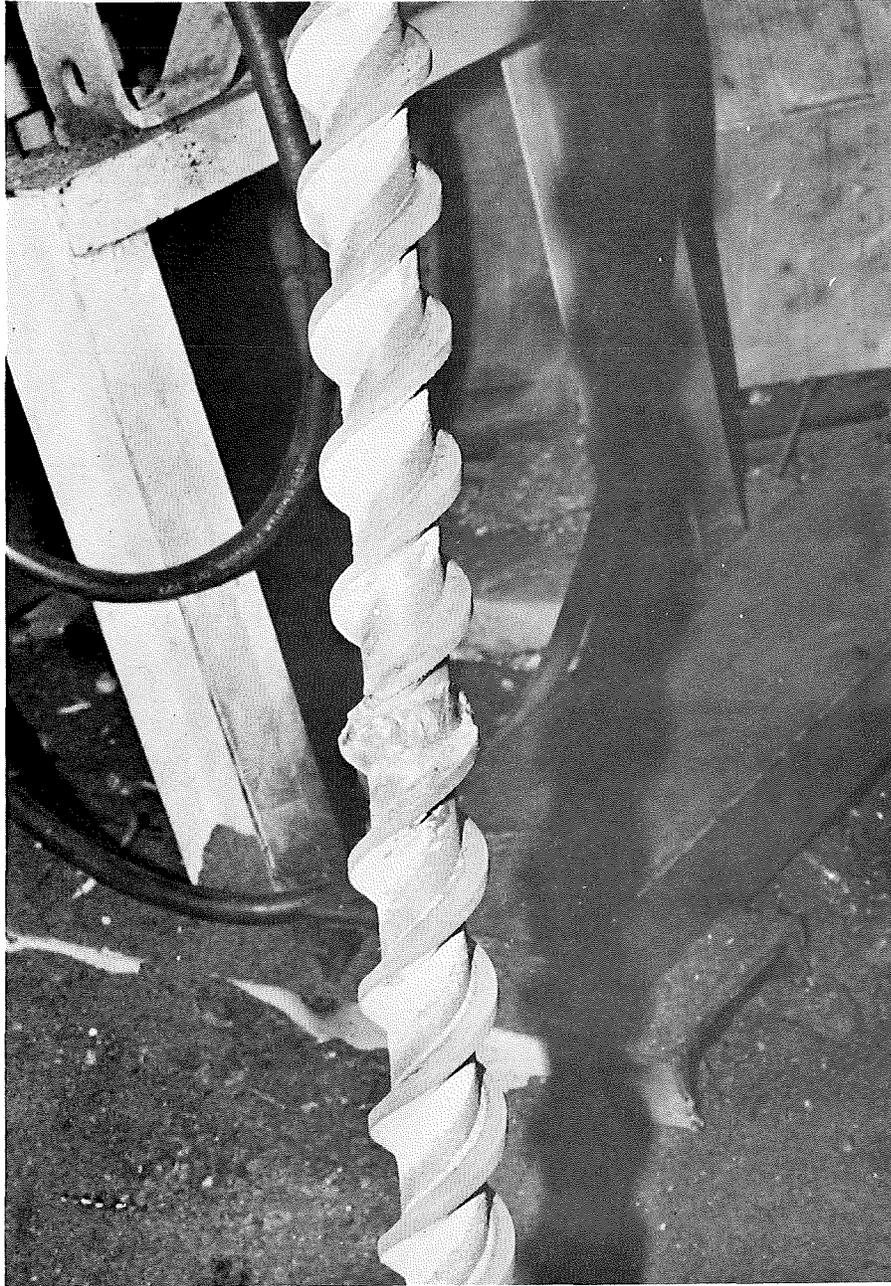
Weld repair of an auger mining drill requires special procedures to weld the high alloy and carbon steel.
